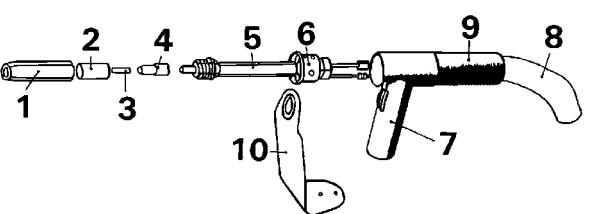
Gun for metal inert/active gas (MIG/MAG) or self-shielded flux-cored arc welding
